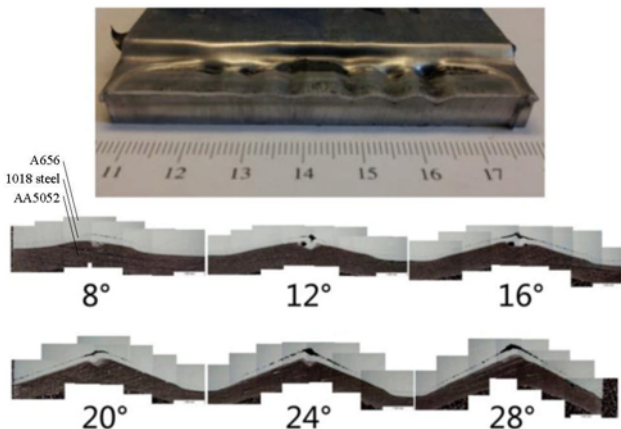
Cross section of HSLA656/1018 steel/AA5052 welded sample.
